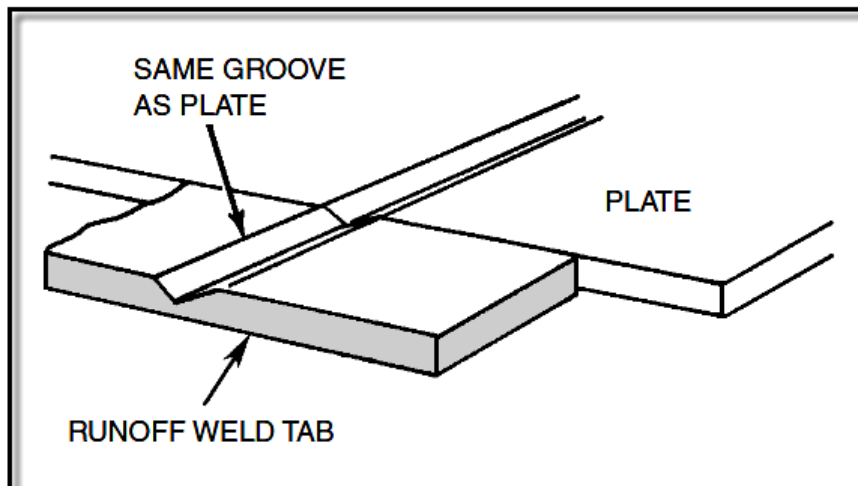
Runoff Weld Tab at End of a Joint
